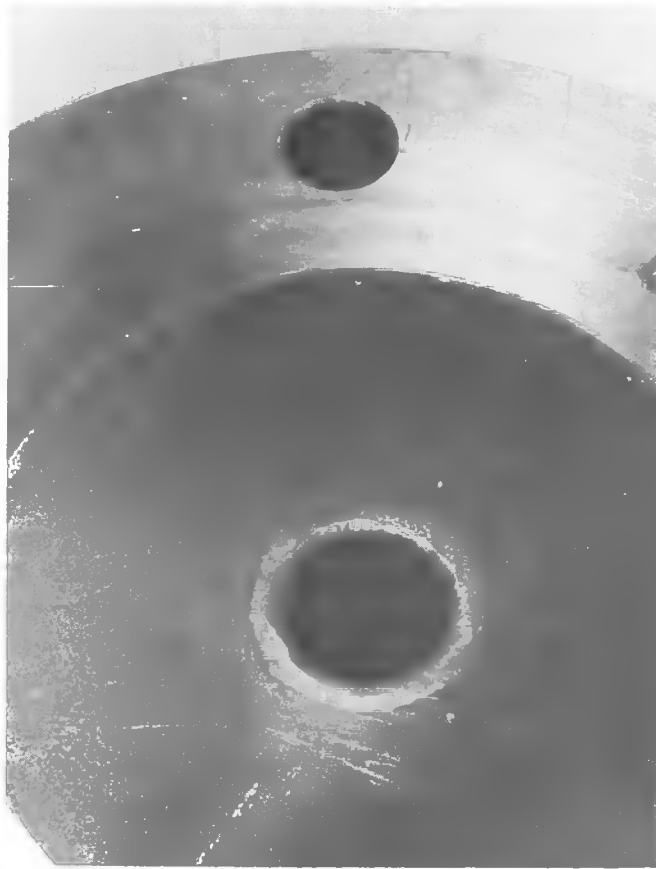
Crevice Corrosion and Weld Decay on Type 304L Stainless Steel Tube Sheet (Exposed 500 h to nitric acid and HLLW at boiling)
